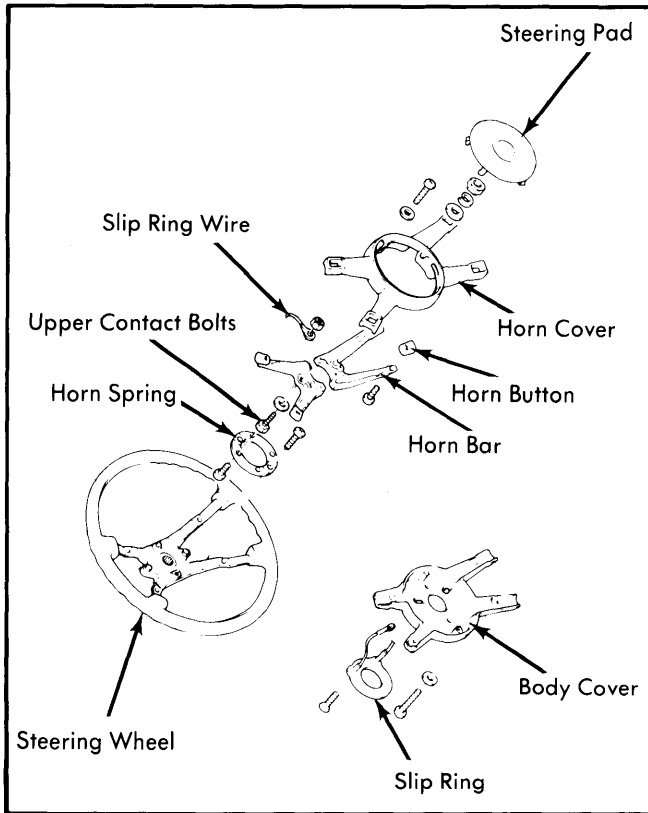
Exploded View of Accord Steering Wheel and Related Components
